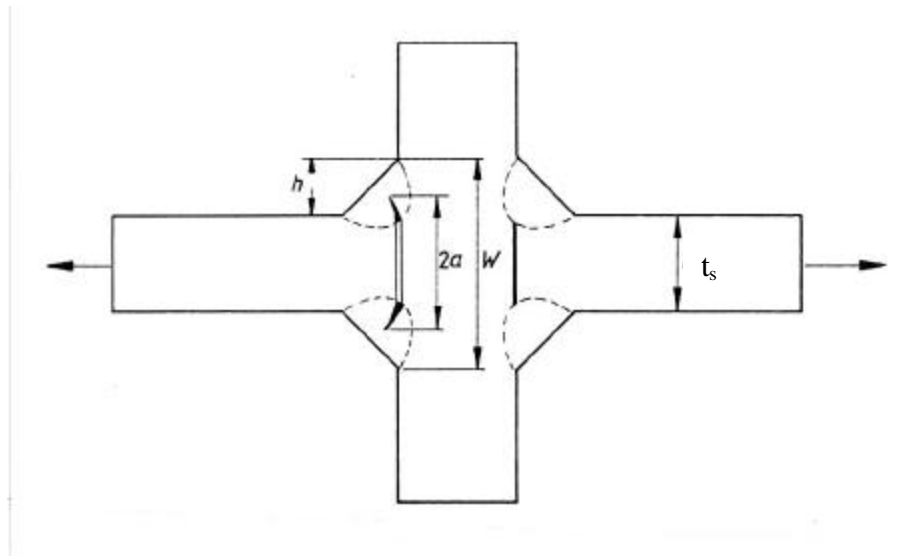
Root Crack at Cruciform Joint with Partial Penetration Fillet Welds
